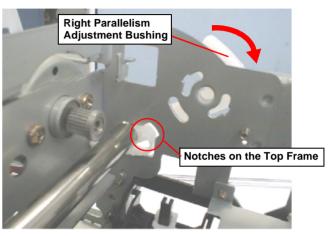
Removing the Right Parallelism Adjustment Bushing
